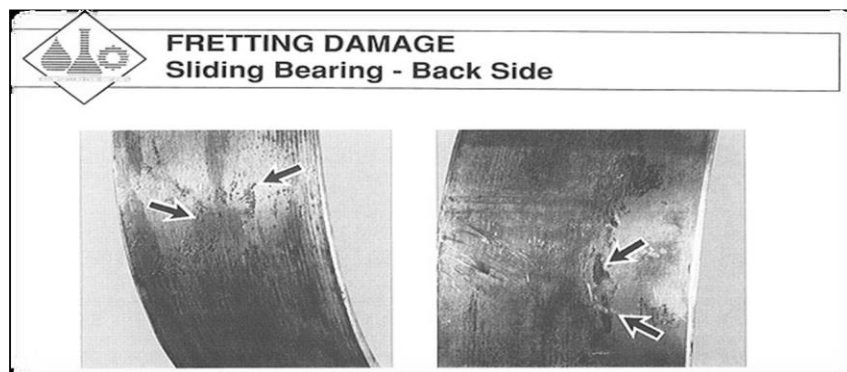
the damaged surface of a bearing due to fretting Wear (Hutchings, 1992)
